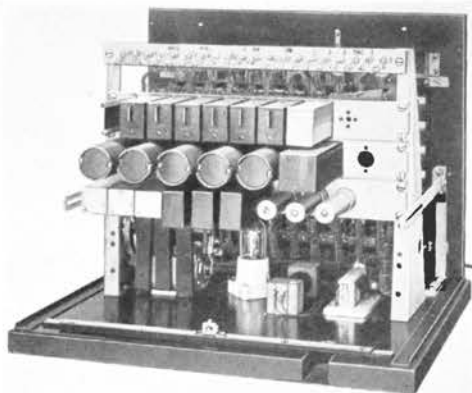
The mounting-plate assembly is in the foreground, in this picture taken from the rear
